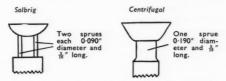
Illustrates the best sprueing method for Solbrig steam pressure casting and centrifugal casting.
